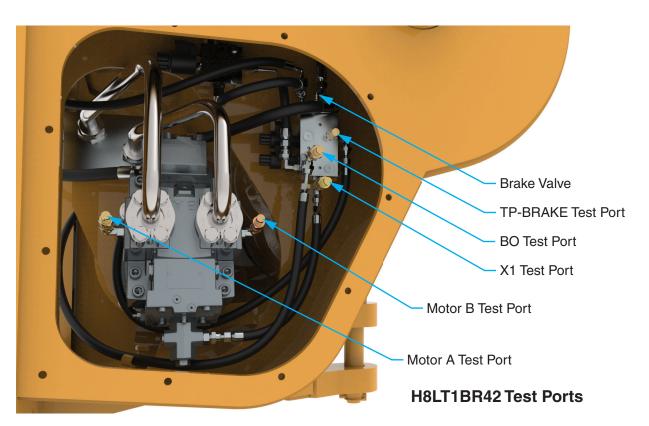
Case 1650M/2050M (R42) Installation Test Ports and Brake Valve Locations
